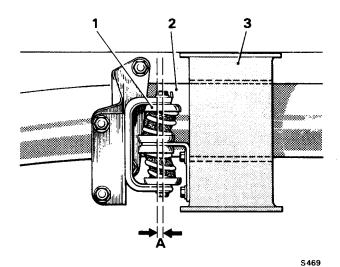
EXHAUST MOUNT - SHOWING OFFSET
